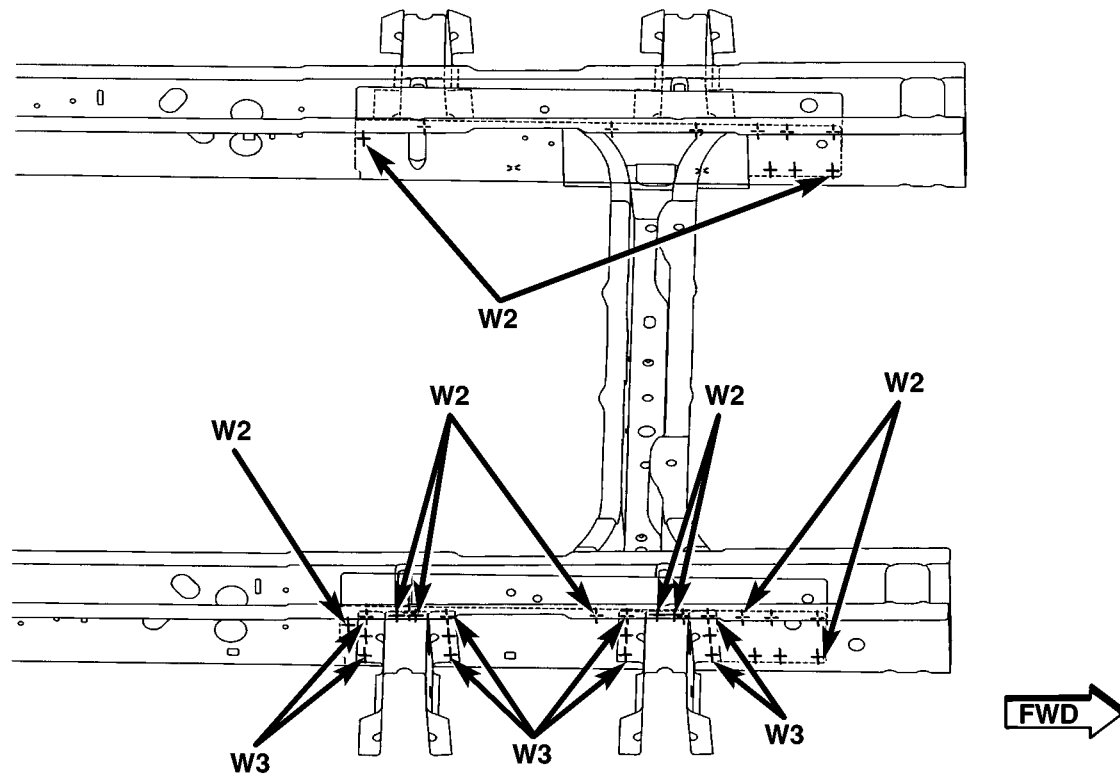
FLOOR PAN REINFORCEMENTS - SIDE RAILS
